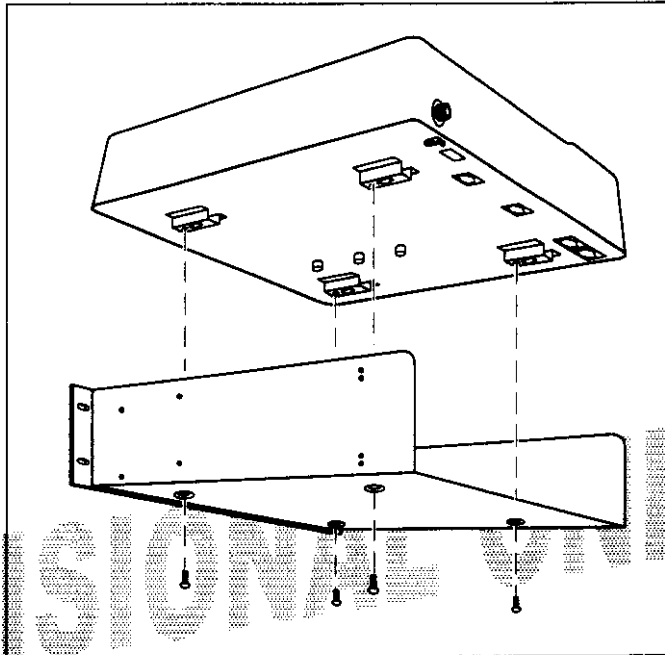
Wall Mount Positioning in Rack Mount Shelf
